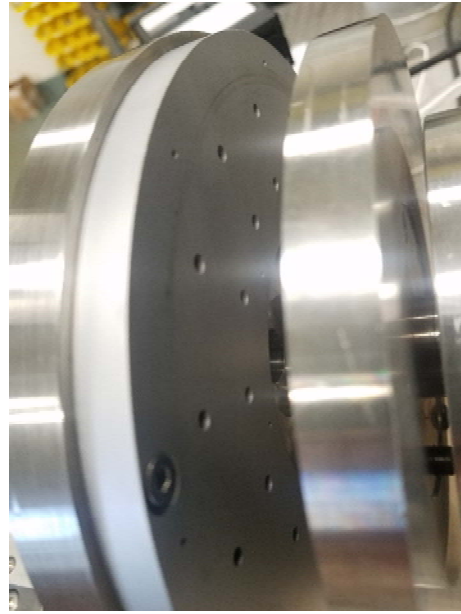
Back Plate Can be used as a Thrust Flat Air Bearing
